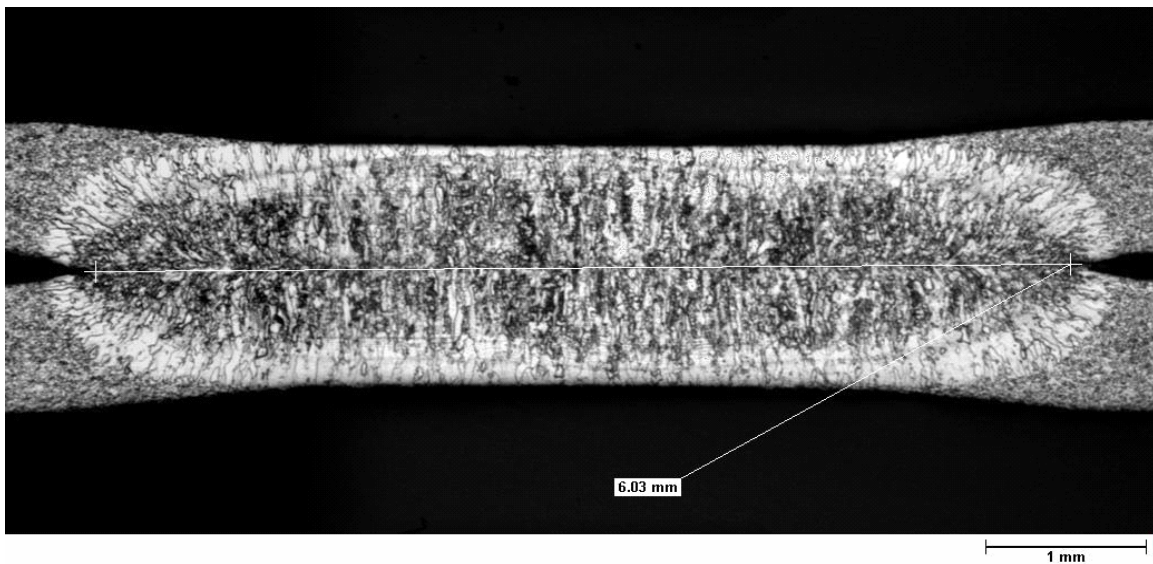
Metallography of weld spot nuggets of step 6, welded sample, Dalex PMS
